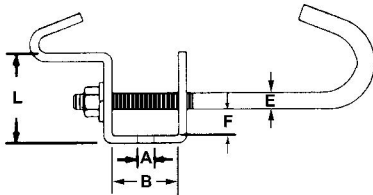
ADJUSTABLE ROD BEAM CLAMP
